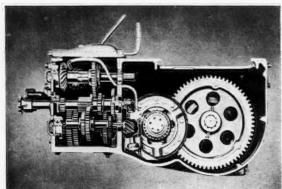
ANOTHER TRACTOR TRANSMISSION DESIGN UTILIZING LARGE BULL GEARS FOR THE REAR AXLE DRIVE
